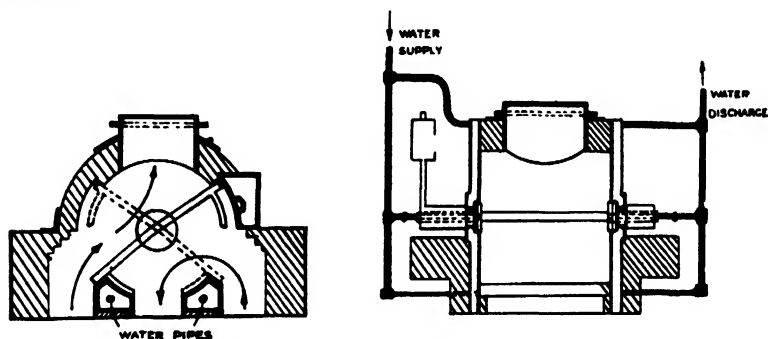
THE W. R. MILLER WATER-SEALED GAS REVERSAL VALVE.
